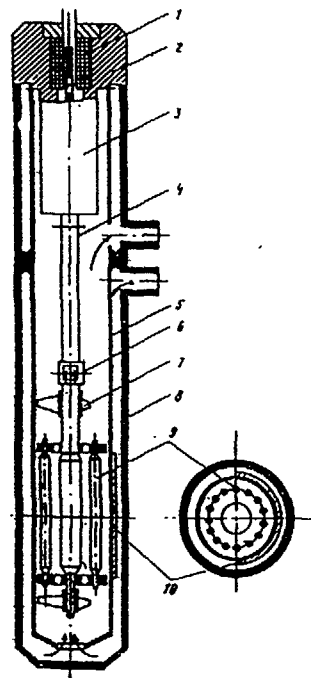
Irradiator TC-2M: 1 – indicator of fuel assembly location; 2 – head; 3 – turnable mechanism; 4 – suspension rod; 5 – flow separator; 6 – hinge; 7 – spacer sprocket; 8 – vessel; 9 – fuel element; 10 – shield.
